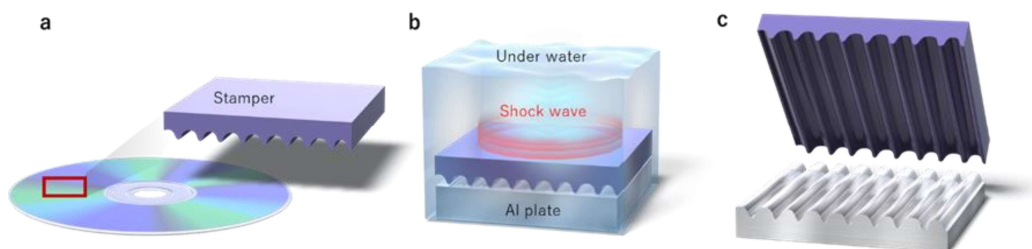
Schematic of the impact imprint process. (a) Preparation of the DVD stamper. (b) Stamper and Al workpiece subjected to the underwater shock wave. (c) Imprinted Al workpiece.
